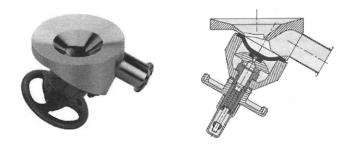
Weir type diaphragm valve for hygienic tanks Courtesy of ITT Corporation
